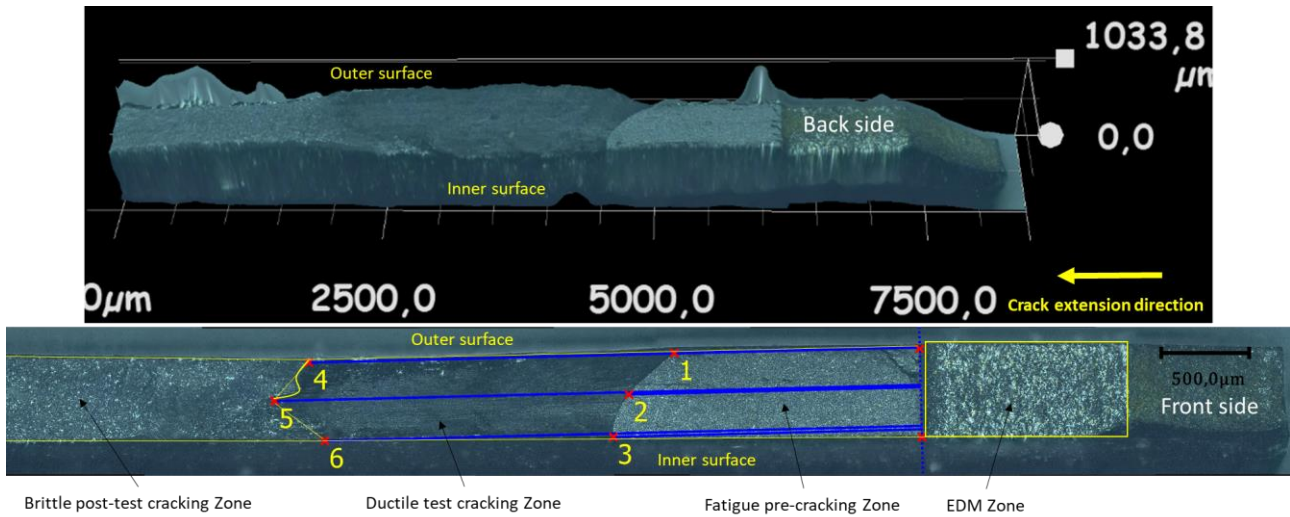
Front and back sides failure surfaces with fatigue pre-crack and final crack extension measurement procedure
